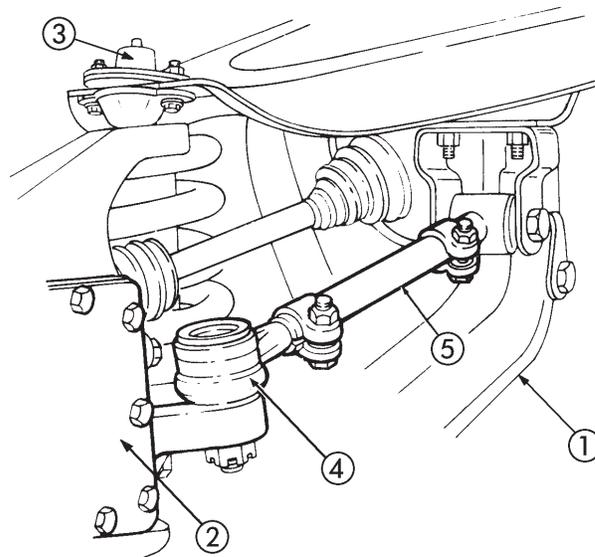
Toe-Out Rear Wheel Check Adjustment.
